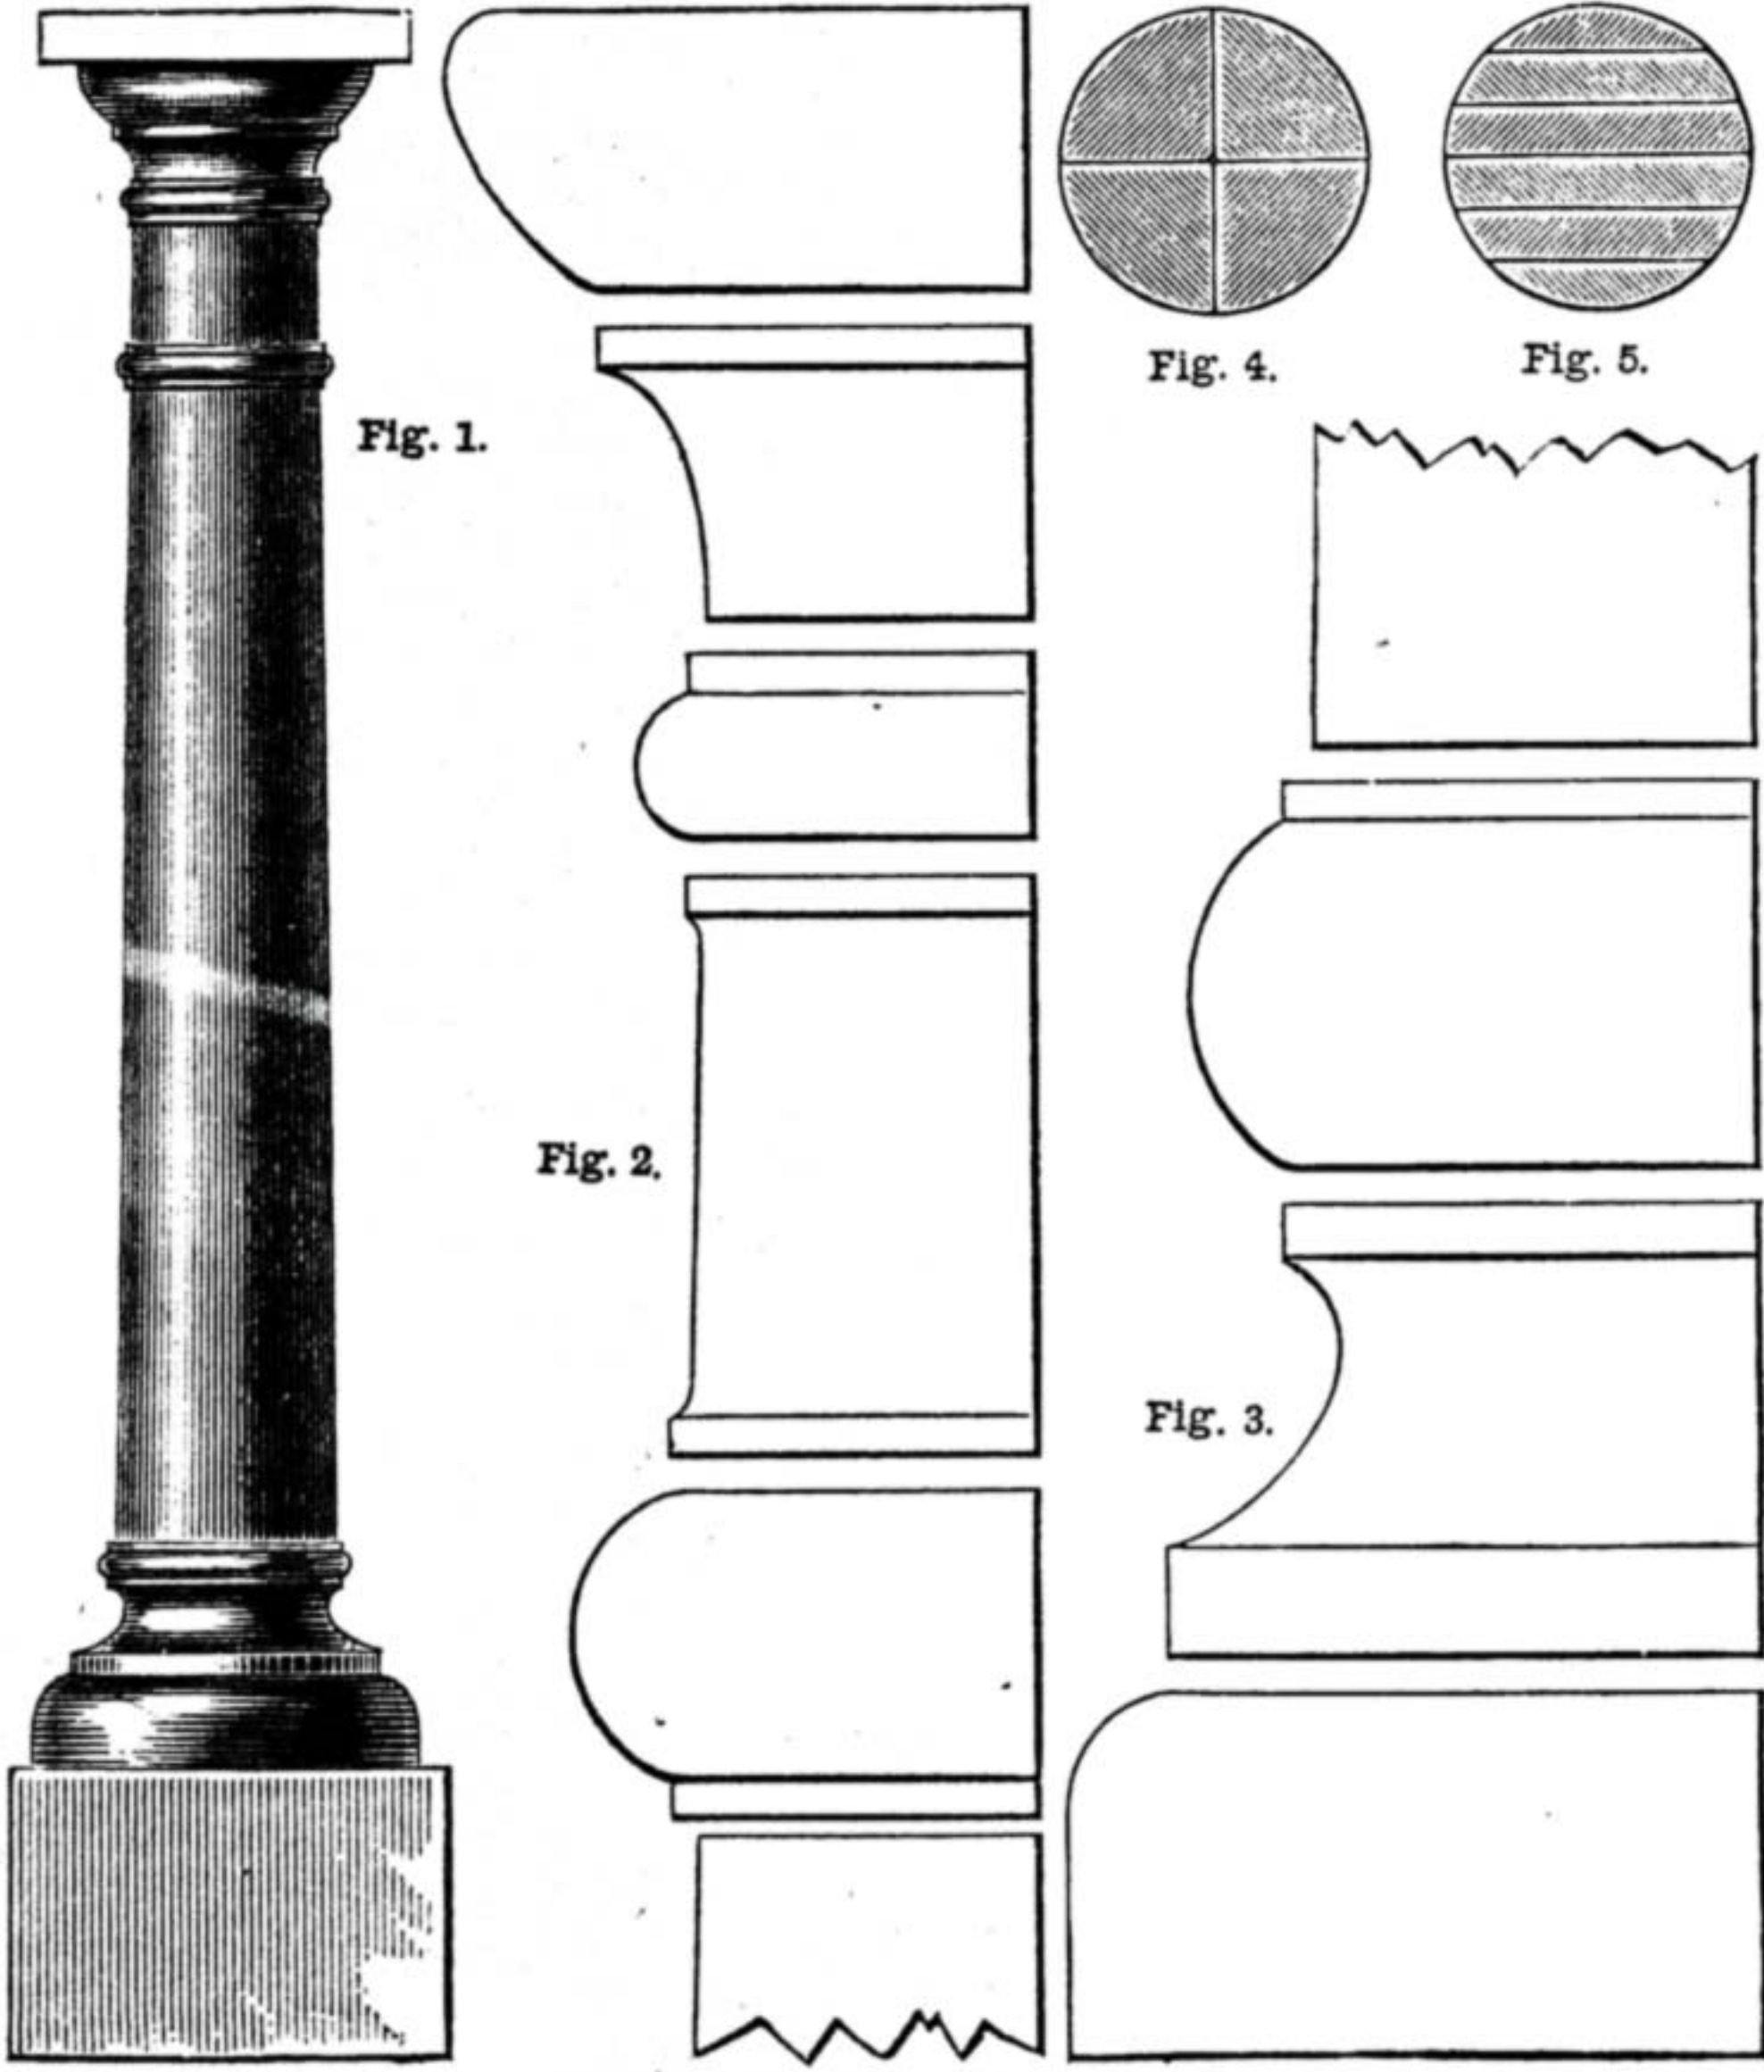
Pedestal. Fig. 2.—Upper Part (one-third full size). Fig. 3.—Lower Part: ditto. Fig. 4.—Column built up of Four Pieces. Fig. 5.—Column built up with Boards.
